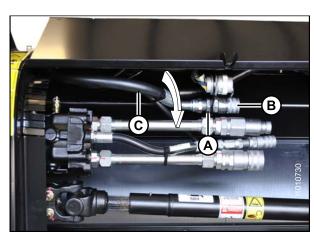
Auger and Reel Pressure Coupler and Hose – 18-Ft. Header Shown
